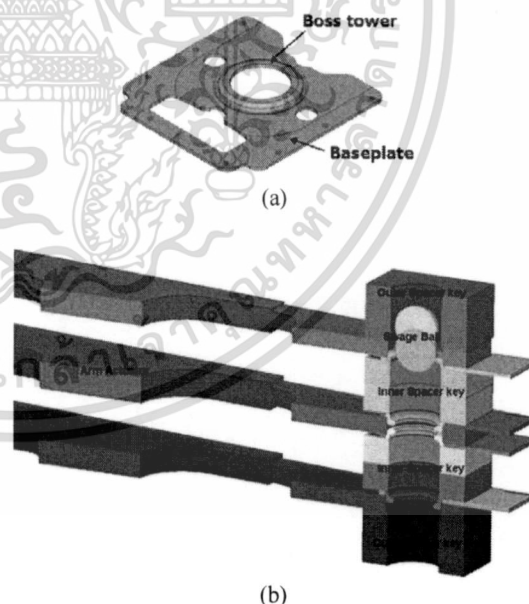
(a) Components of a baseplate and (b) the assembly for swaging process
